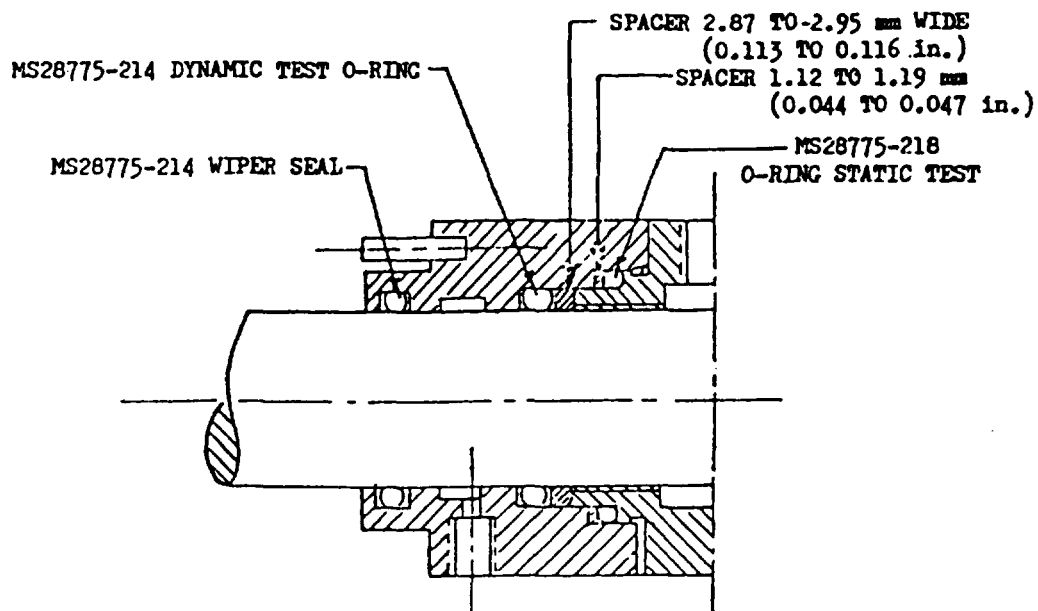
CYLINDER ASSEMBLY WITHOUT BACK-UP RINGS
